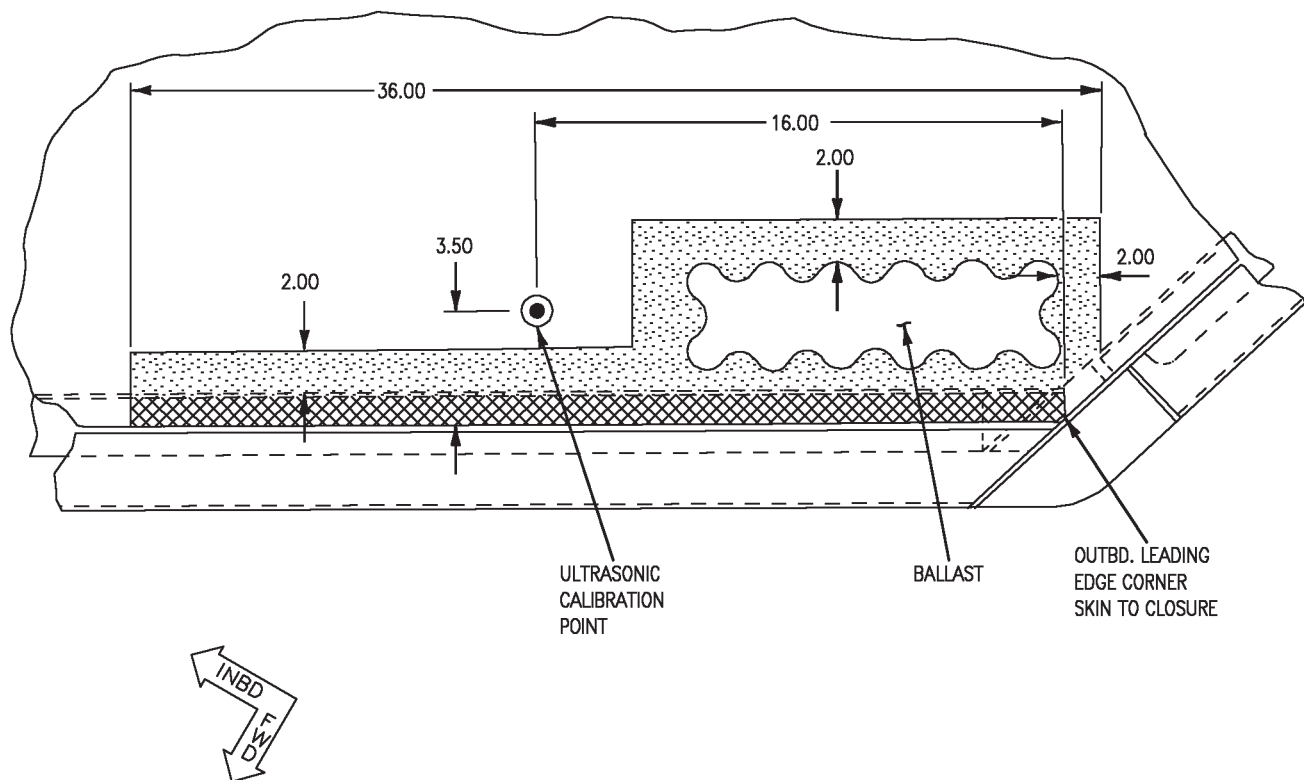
X-Ray Setup for Honeycomb Core Inspection and Locating Ballast (Sheet 5)
